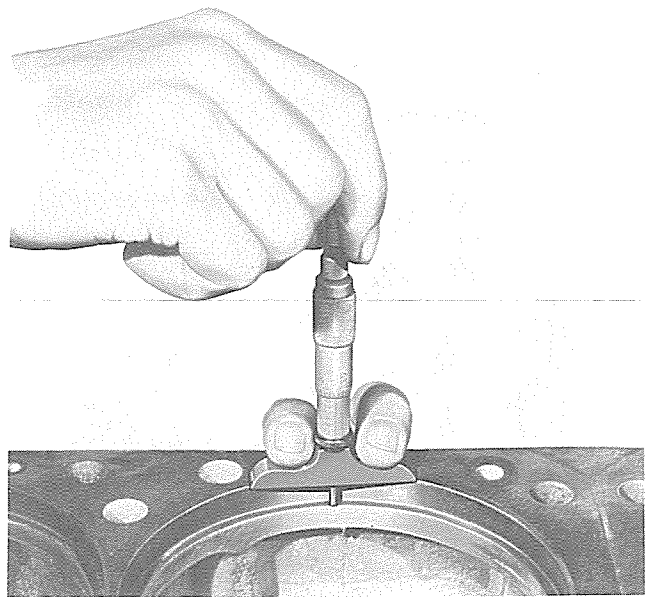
Measuring Depth of Cylinder Sleeve Counterbore
